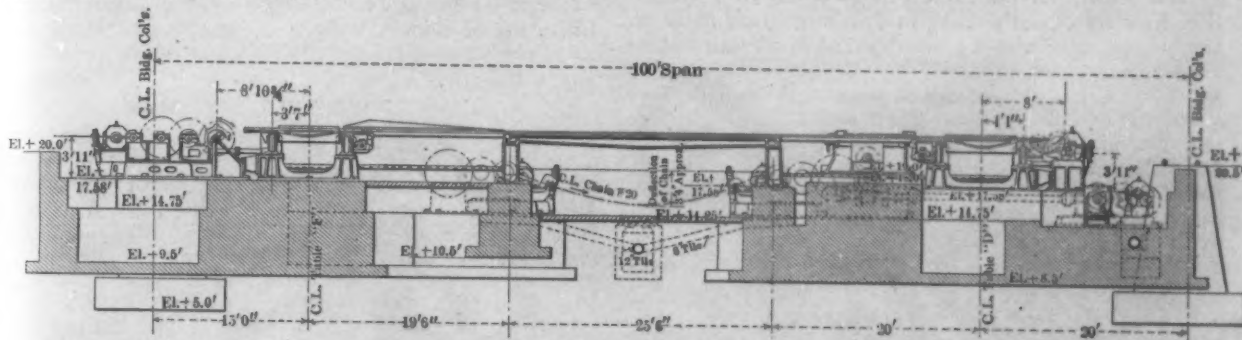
Cross-Section of Cooling Beds, Showing Jointed Table Design.
